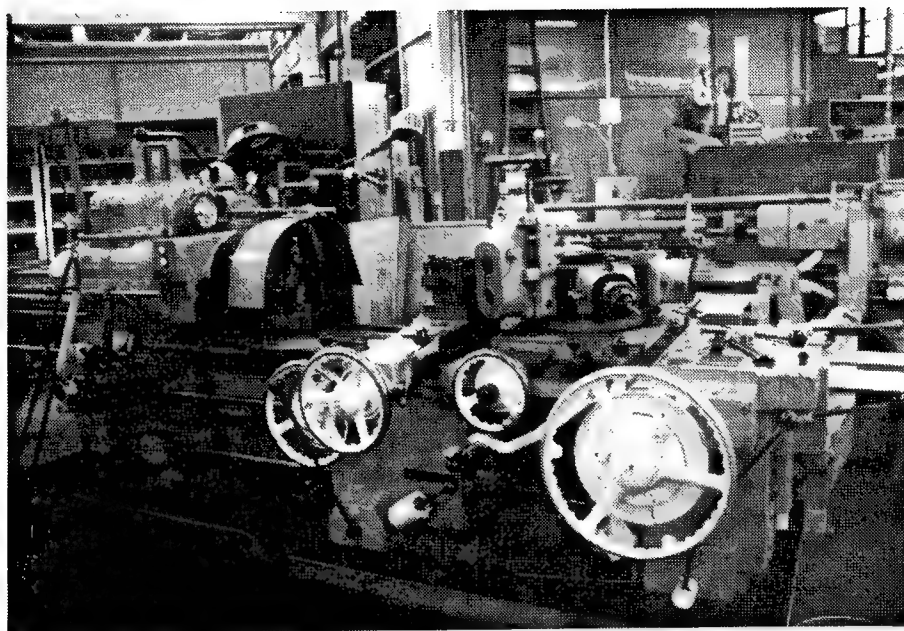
Building 3: Turret Lathe located in the Machine Shop Area of Building 3. This machine was manufactured by Warner-Swasey.
